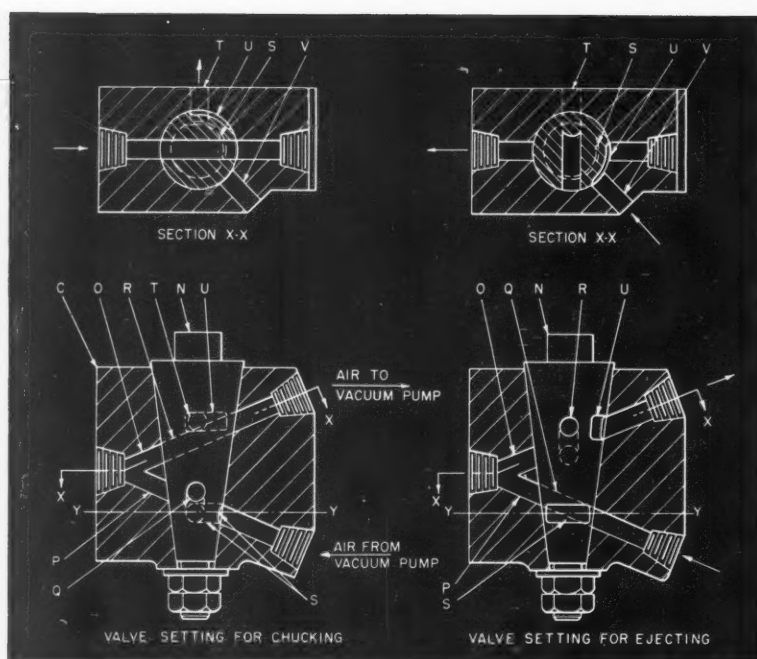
Details of the special air valve employed on the vacuum chuck shown in Fig. 1. The valve setting for holding the work on the chuck is seen at the left, and that for ejecting the part at the right
